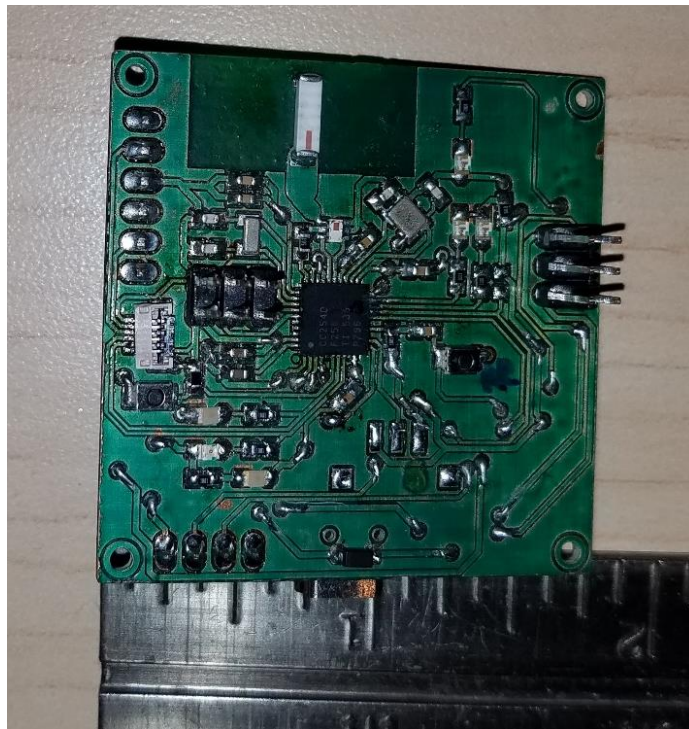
Bluetooth Face of the Assembled PCB for the Microcontroller and Bluetooth
